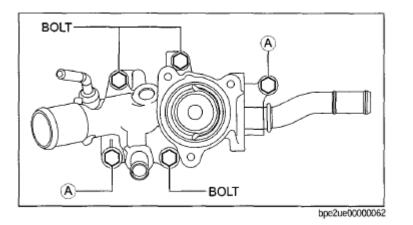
Identifying Water Outlet Assembly Mounting Bolts
